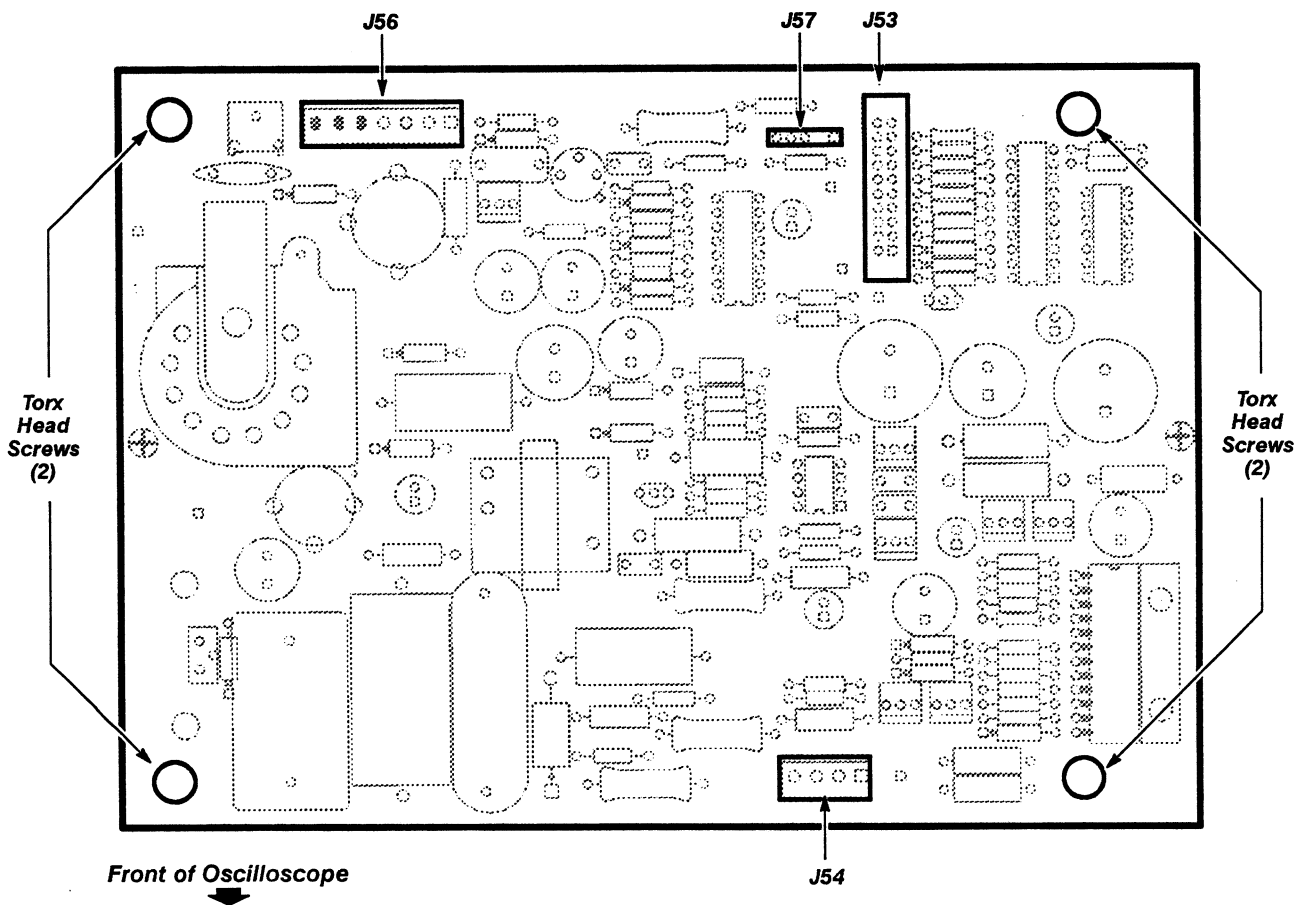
Removing and Replacing the A8 CRT Driver Board
